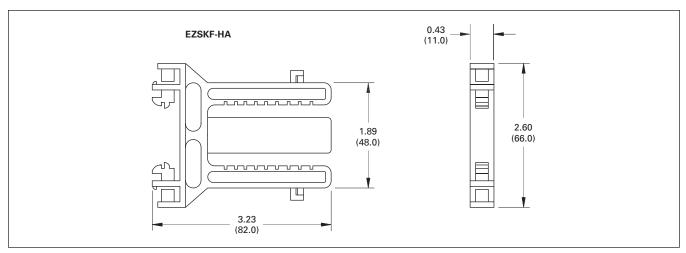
EZSKF-HA Series Dimensions in Inches (mm), Drawing Number MD05013015E
